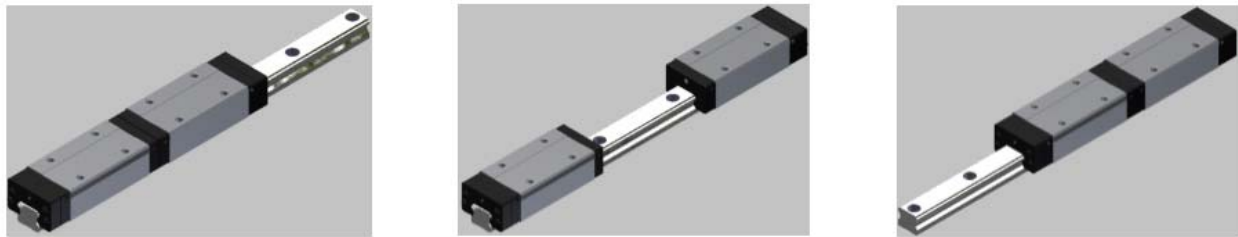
Checking the slide track with two Linear Slide Bearings off the turret. Note that the rails should be immobilized before sliding the bearing housings.
